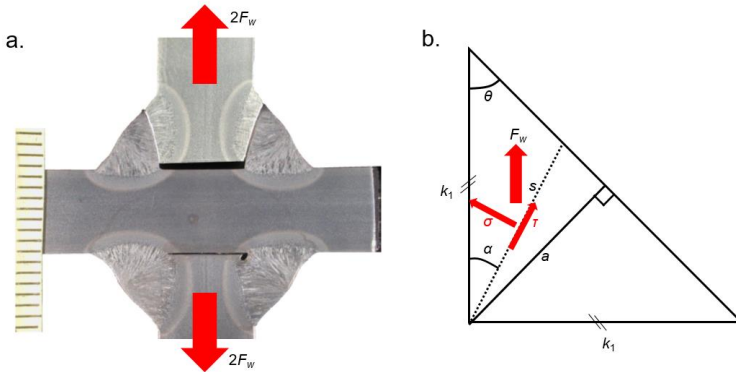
Critical failure plane of weld: (a) an experimental result and (b) the geometry of a symmetric weld.
